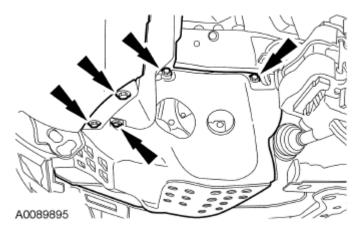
Locating Retainers And LH Splash Shield Courtesy of FORD MOTOR CO.
